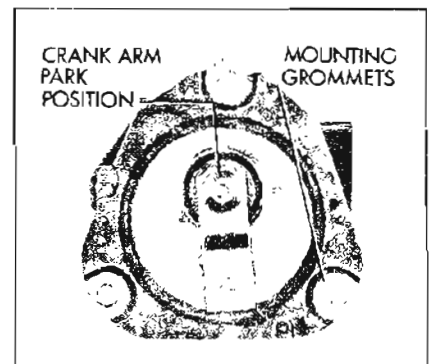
Single and Two Speed Wiper Mounting Grommets
